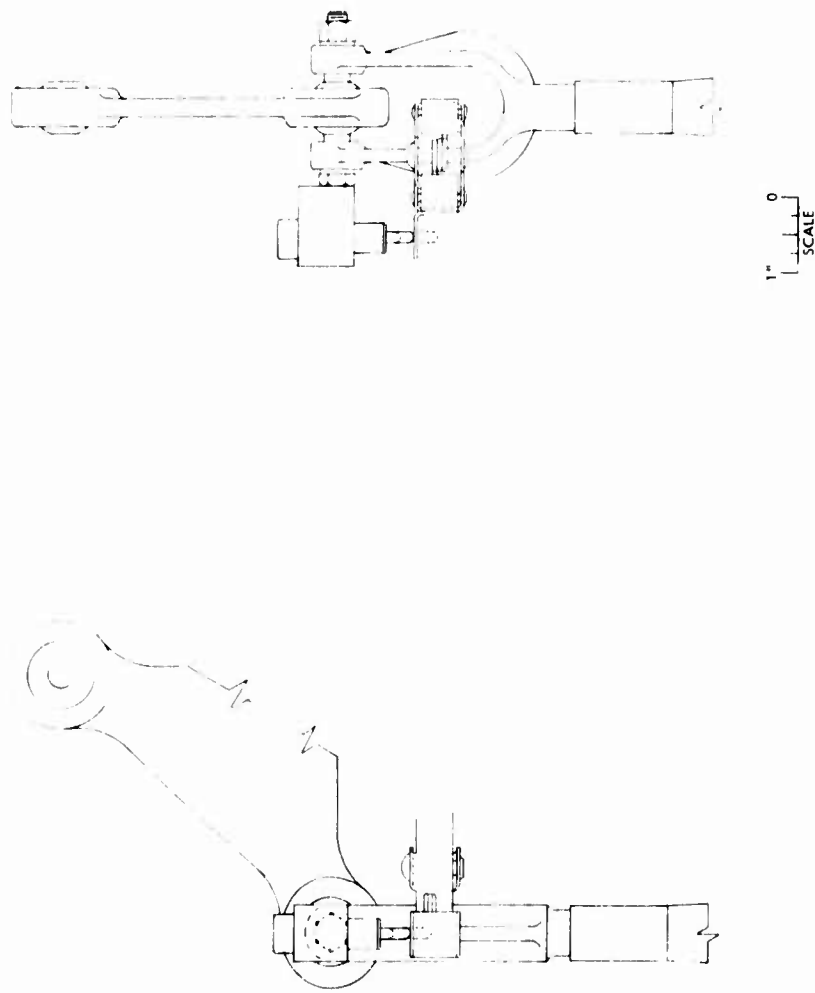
Rod End Bearing Play Sensor (Sheet 2 of 5).
